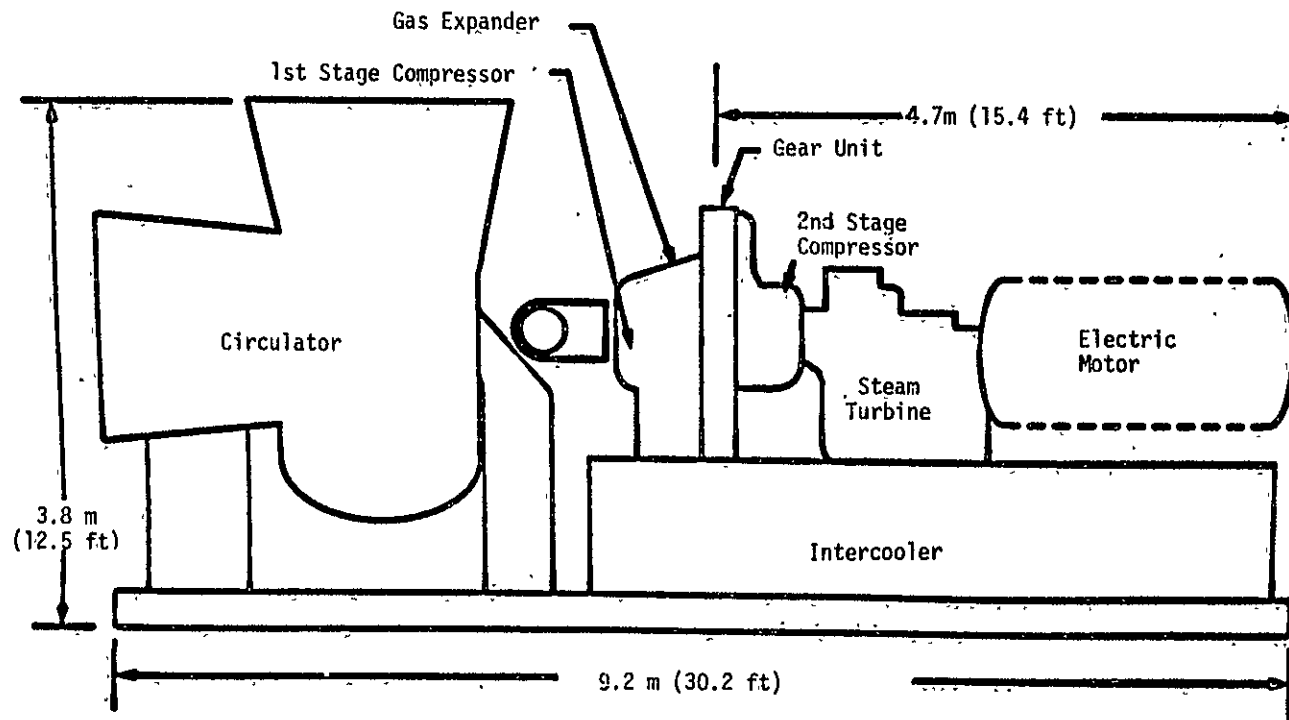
Rotating Equipment System Arrangement (Side View)
